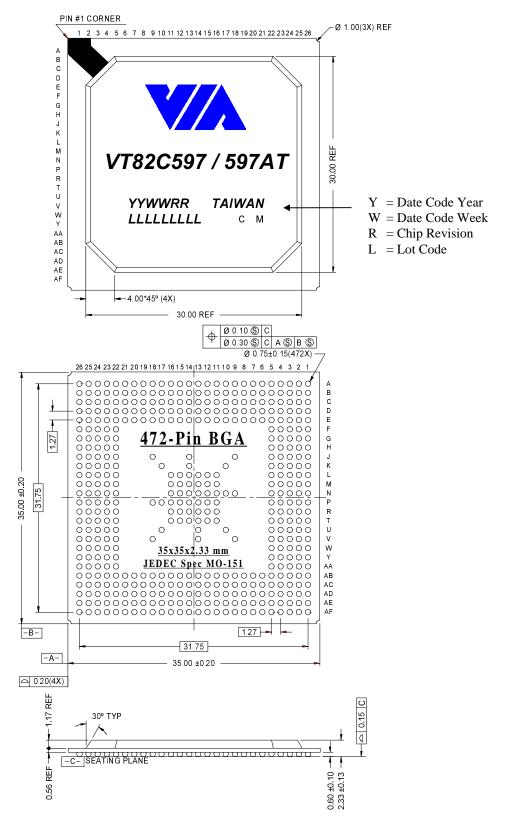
Mechanical Specifications - 472-Pin Ball Grid Array Package
